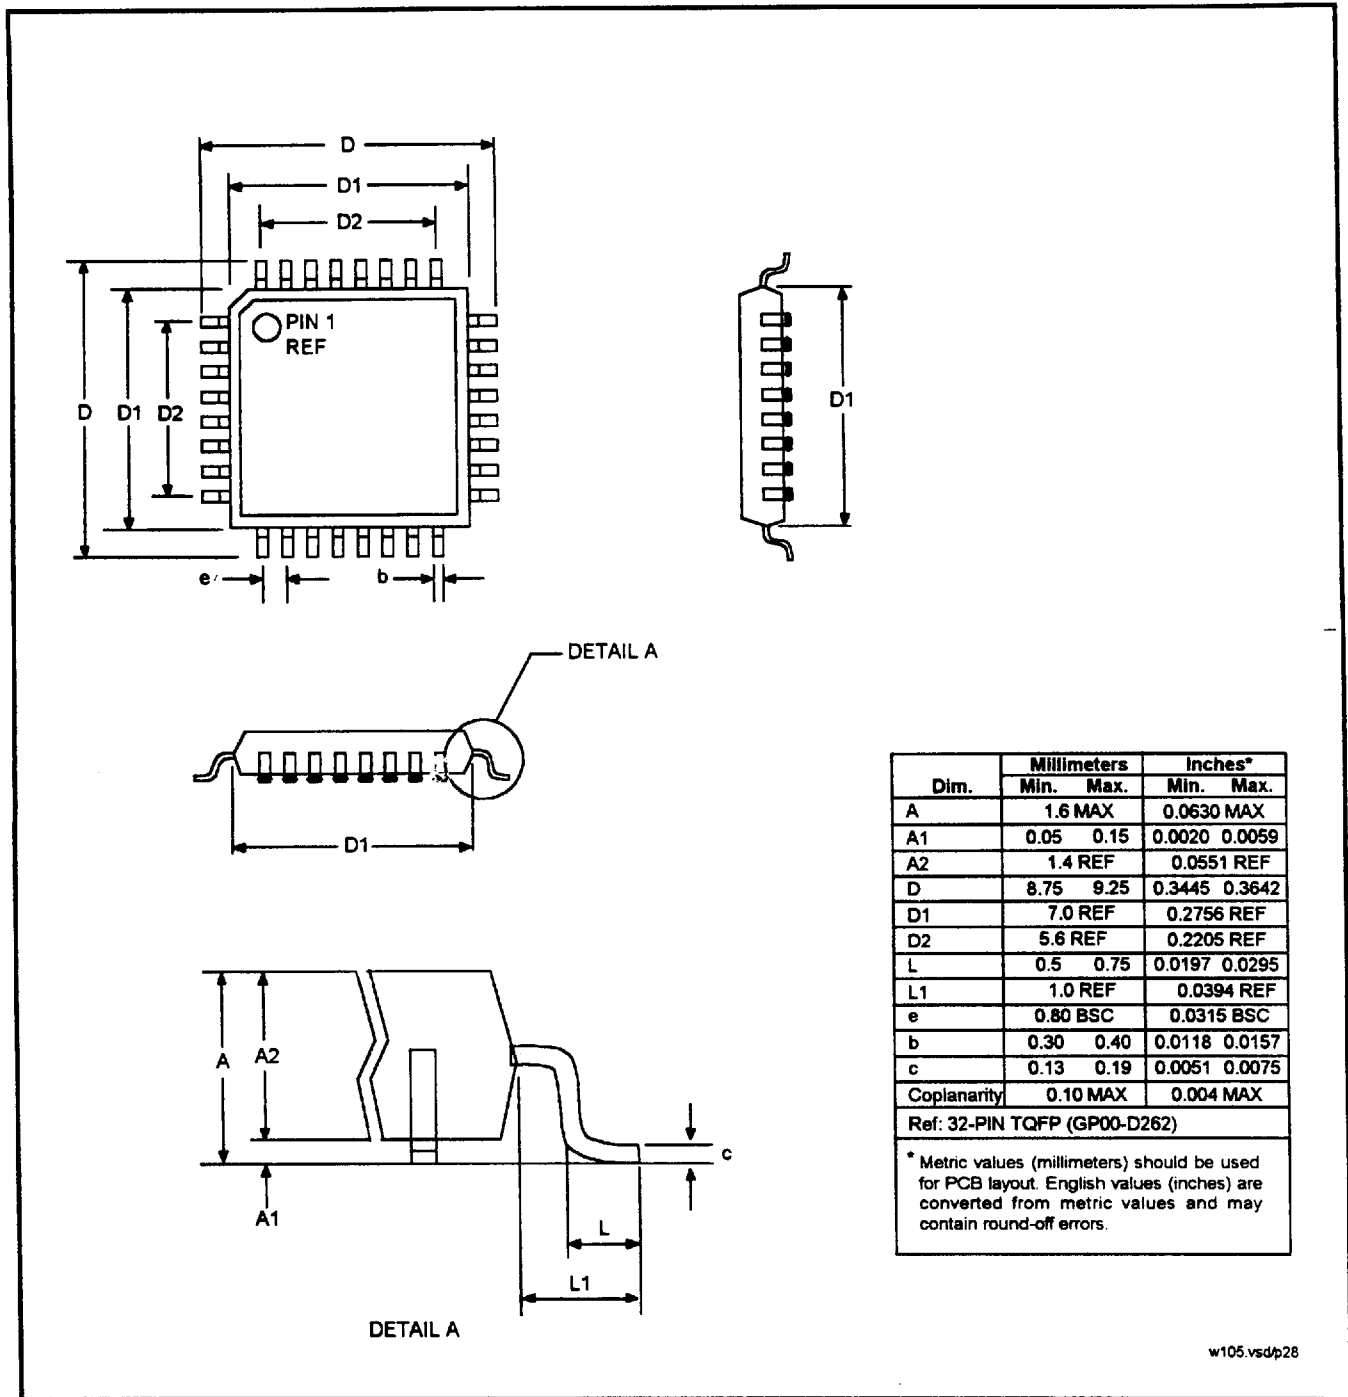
RF101 Transmitter Package Dimensions - 32-Pin TQFP
